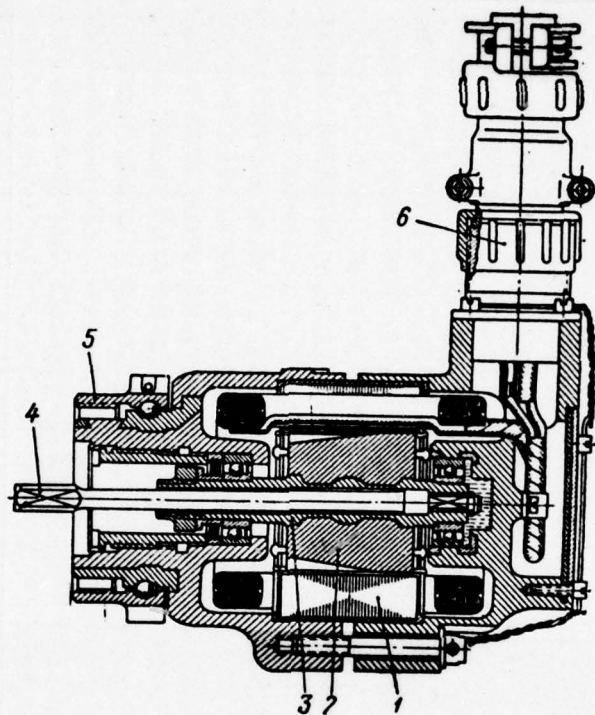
Sensor of tachometer DTE-2. 1 - stator, 2 - rotor (four-terminal magnet), 3 - shaft, 4 - stem, 5 - the adapter nut, 6 - three-prong jack.
